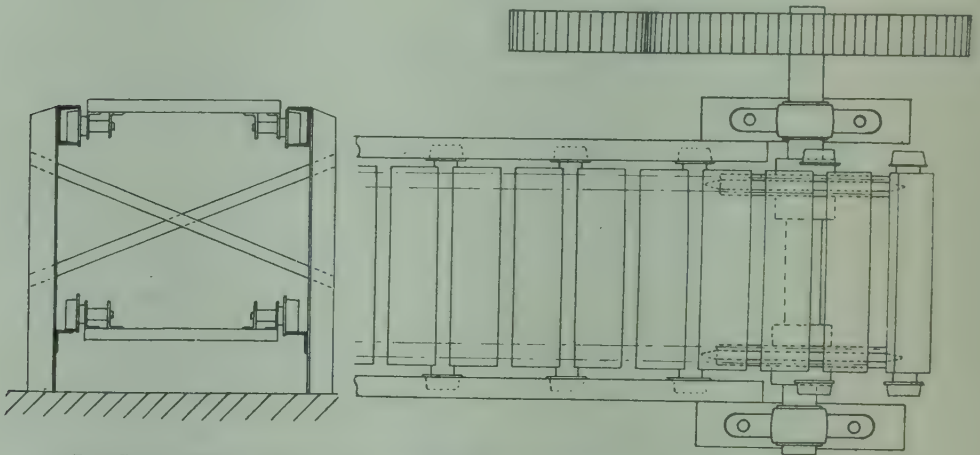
Slat Conveyor, Double Chain showing : left, Cross Section, and right, Plan
